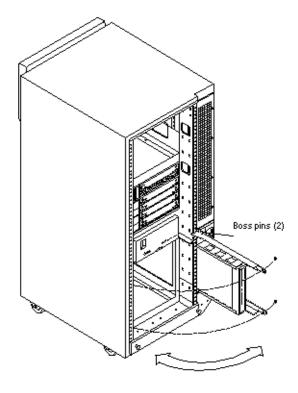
Terminal Concentrator Bracket Installed on the Hinge
